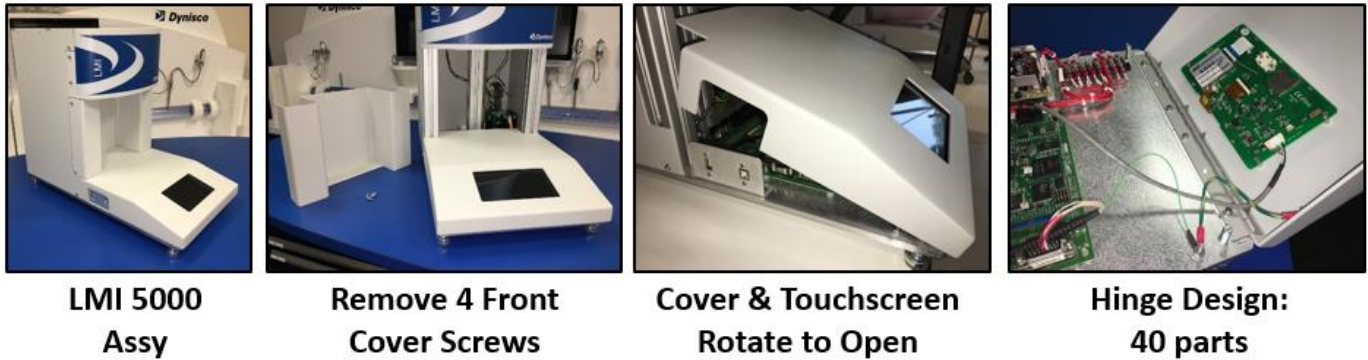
LMI 5000 touchscreen assembly hinge design.
